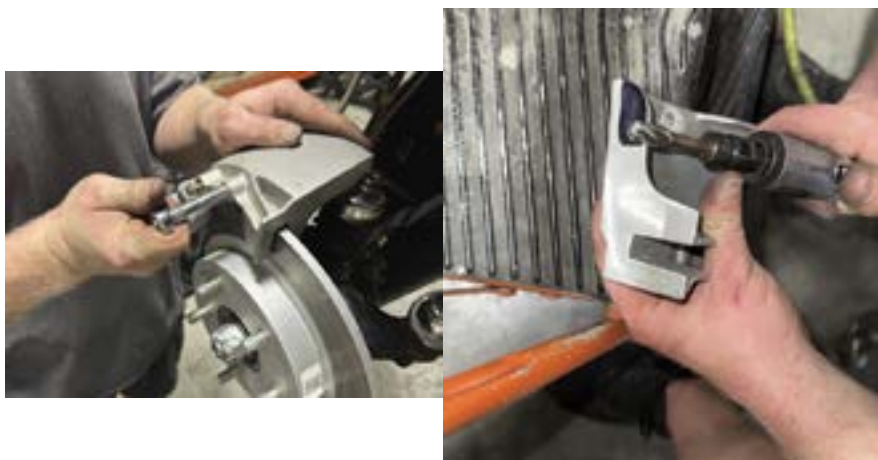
& FIG 22 - Remove and clearance Rock Gaurd (If Applicable)
